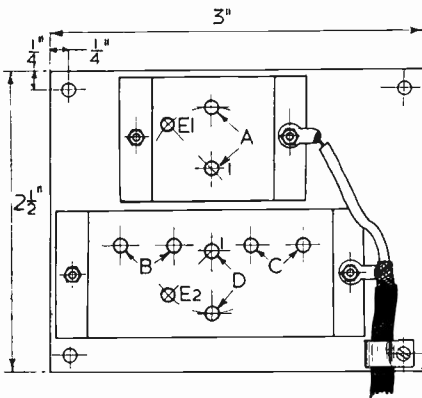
Dimensioned sketch of the two metal brackets and cable clip.
